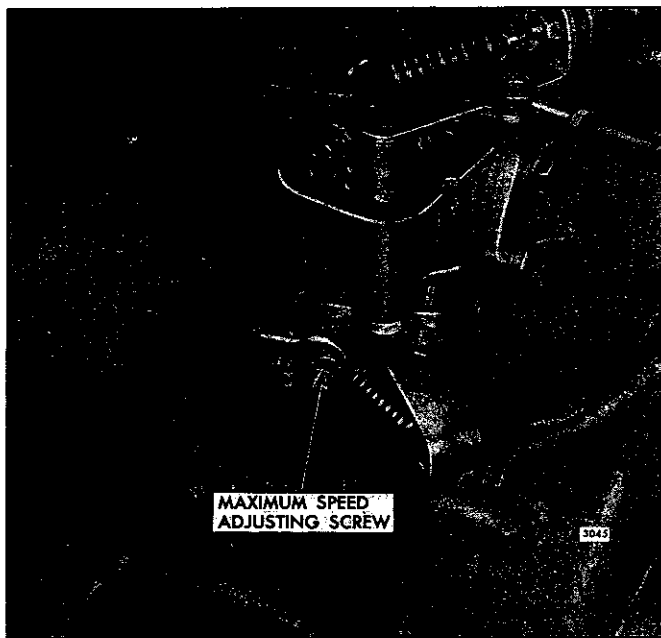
Adjusting Maximum No-Load Engine Speed
